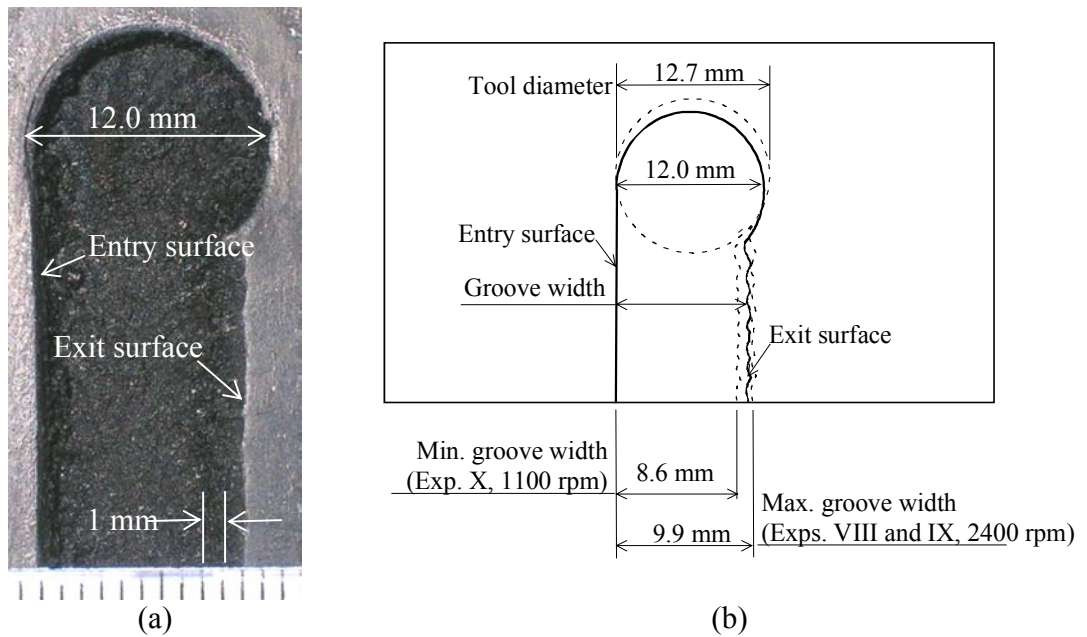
Top view of the groove machined in Exp. VIII at 2400 rpm: (a) picture of the hole generated by retracting end milling tool, and (b) relative size of the tool, hole, and maximum and minimum groove width.
